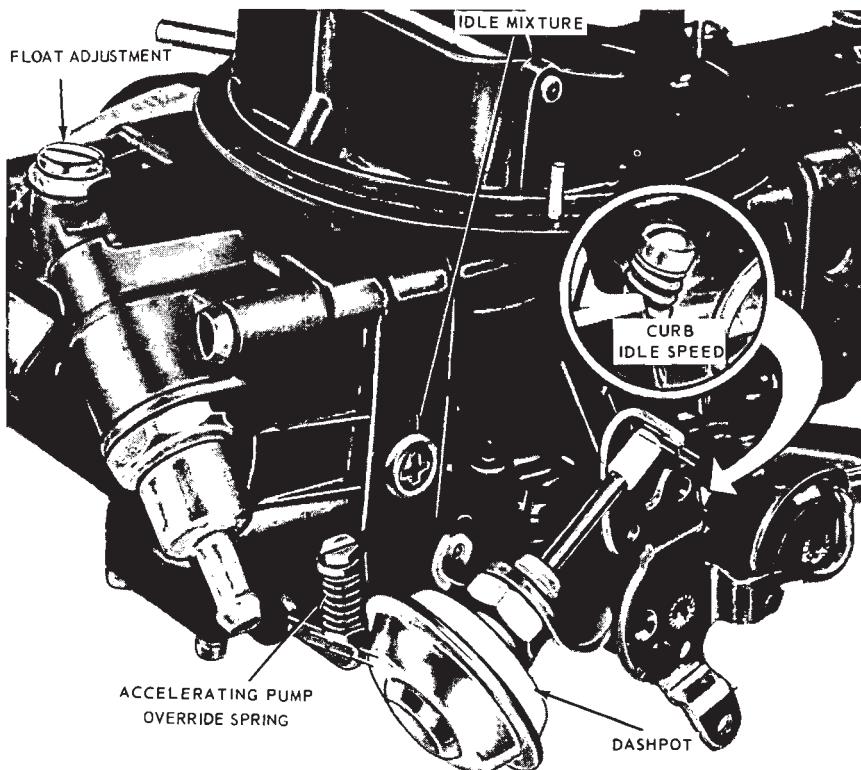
Carburetor Adjustments—Holley Model 4150-C 4-V
